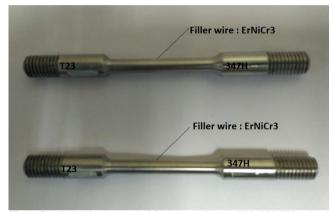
Specimen pieces prepared for hot tensile test (T23+SS347H welded with Filler wire ErNiCr3).
